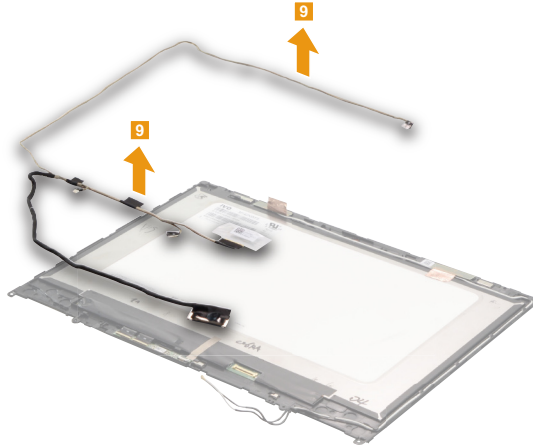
Removal steps of camera board, sensor board and EDP cable (continued)
